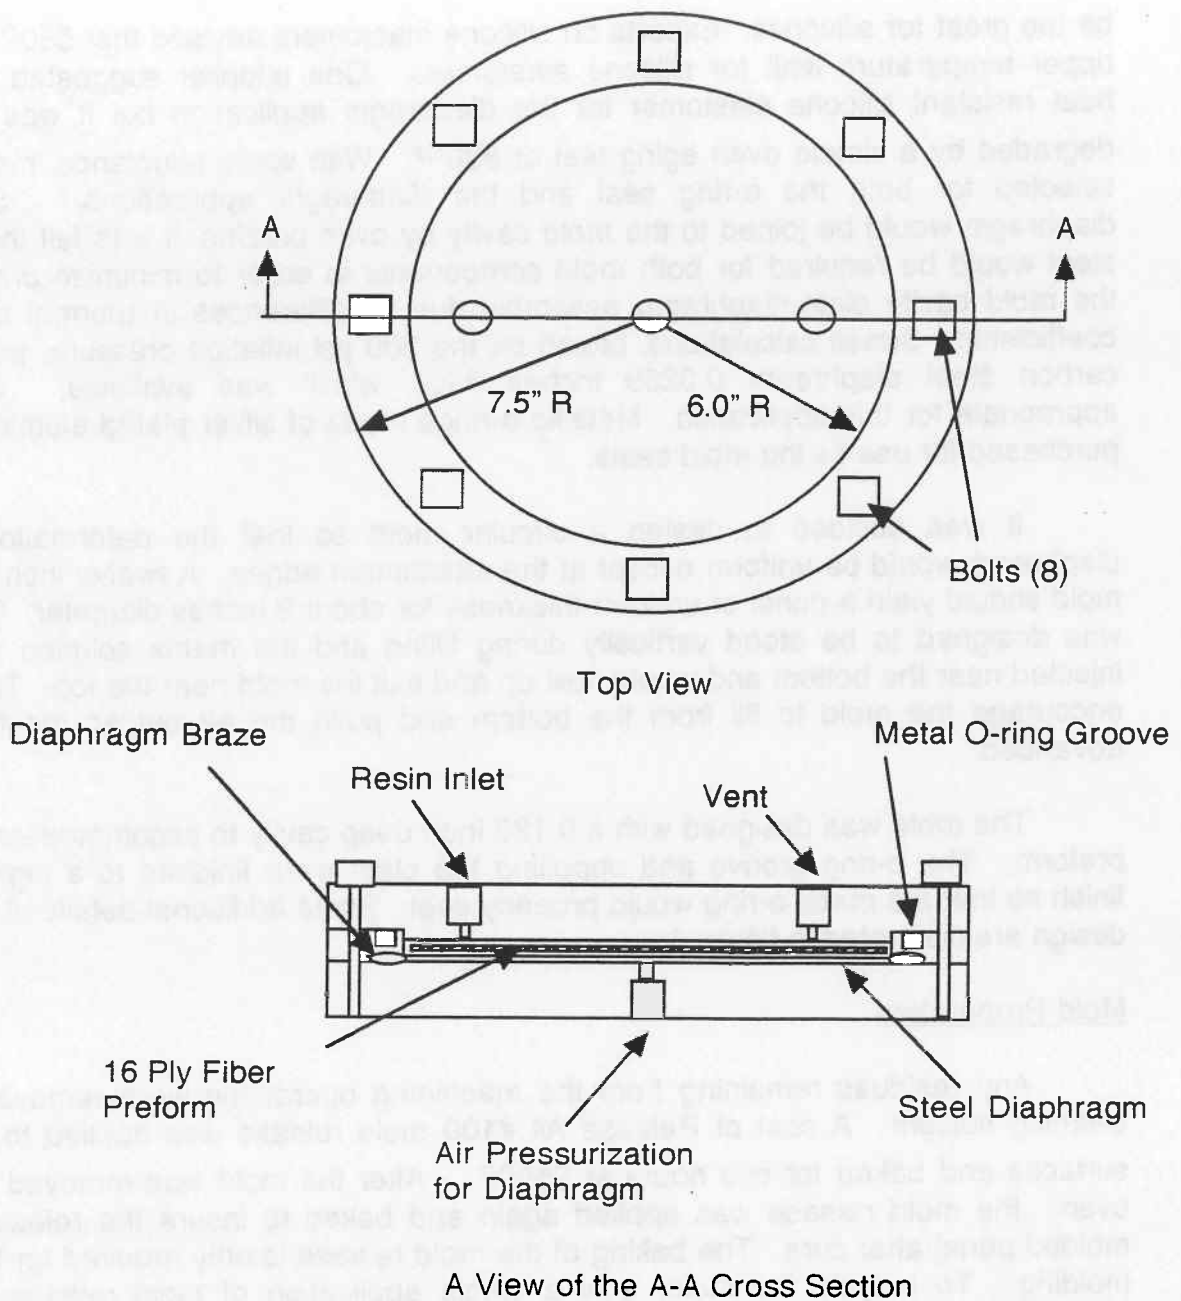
, Top View and Cross sectional View of Diaphragm Mold
